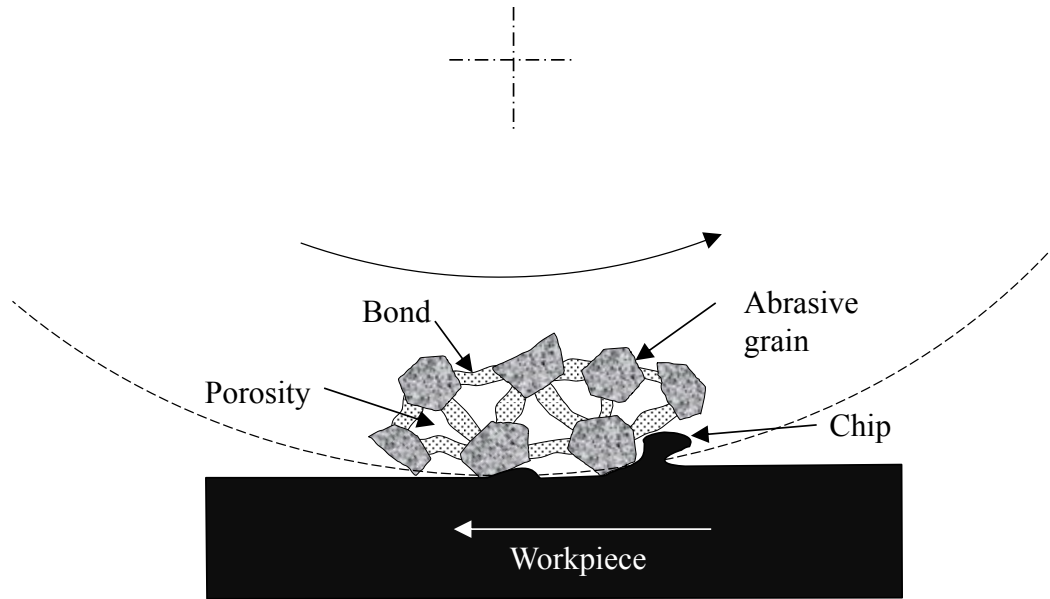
Illustration of grinding wheel components and the chip formation.
